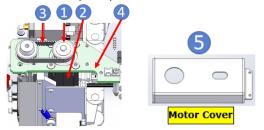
Z-Axis Assembly Using Lower Torque Motor
